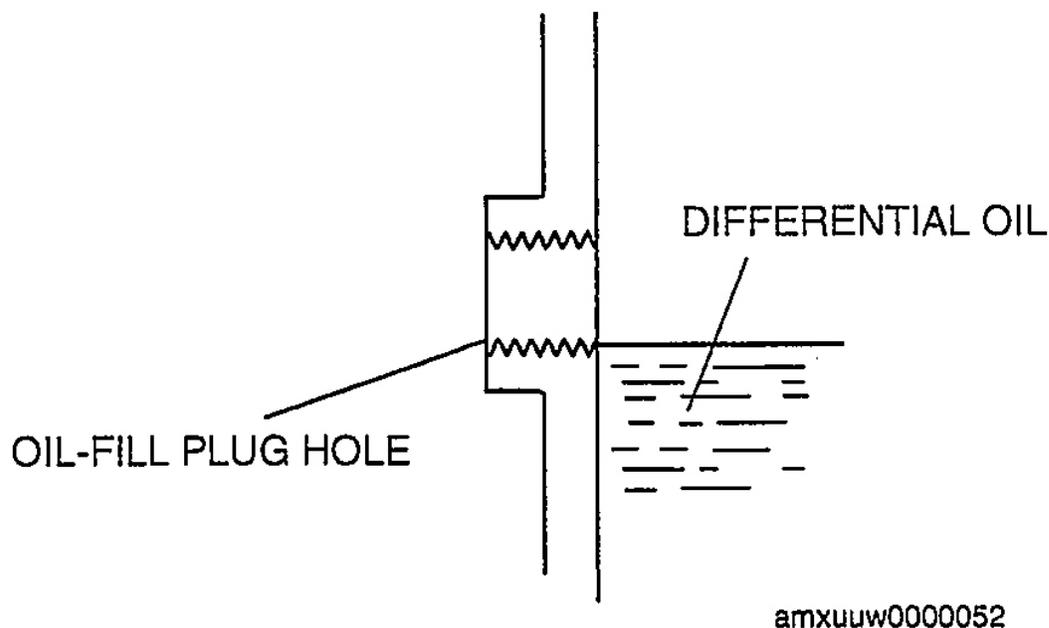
Identifying Oil-Fill Plug Hole & Differential Oil
